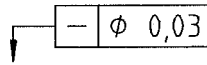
Tolerance zone of cylindrical or circular shape
